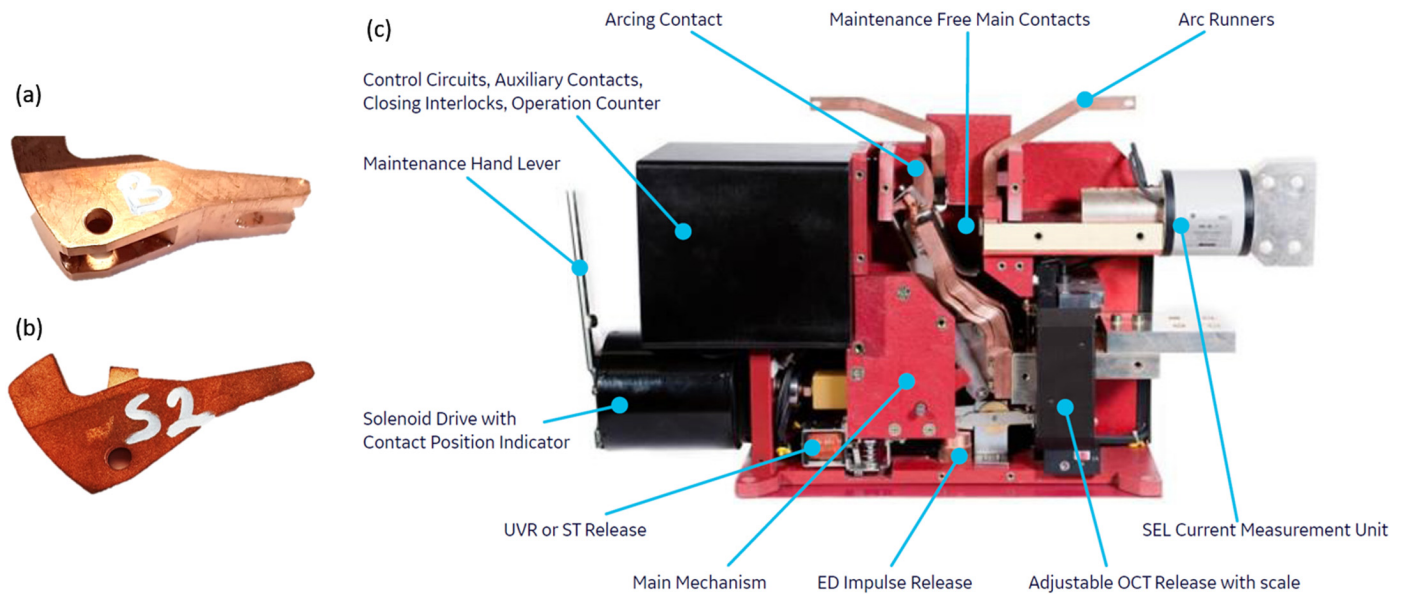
Images of the arcing contacts which were manufactured and used for investigation: (a) reference sample made by SM, (b) 3D printed part by means of BJ process. (c) image of DC high-speed circuit breaker with indicated location of the investigated arcing contact. Reprinted from Ref. [22].
